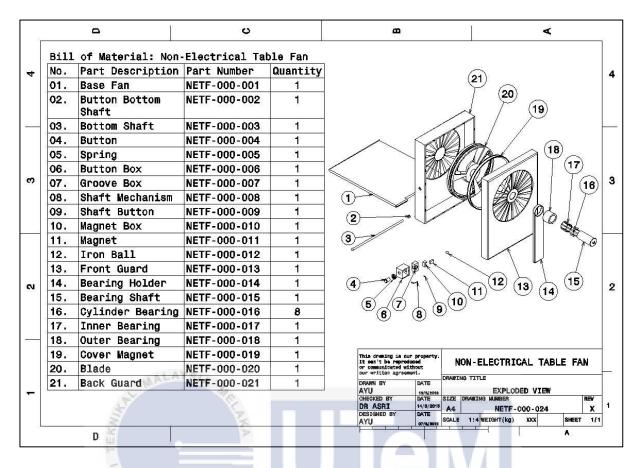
Exploded view of Non-Electrical Table Fan
